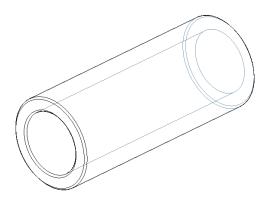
Installation of mechanical seal HJ 977 and MG12, motor side
